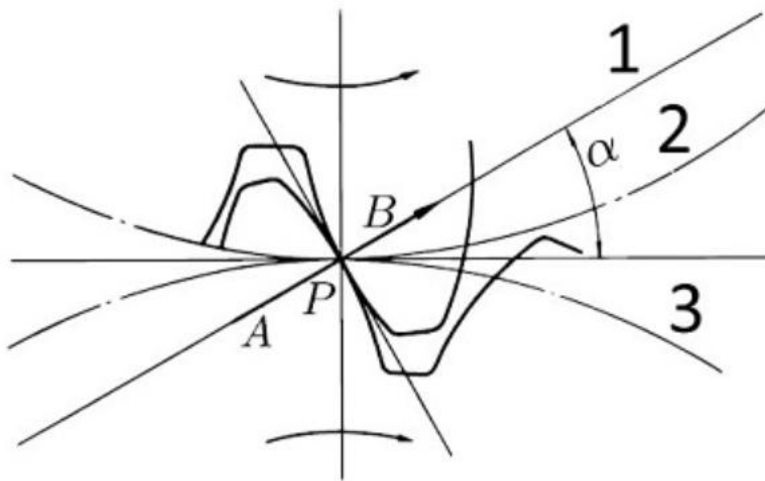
Pressure angle (KHK GEARS n.d.)
